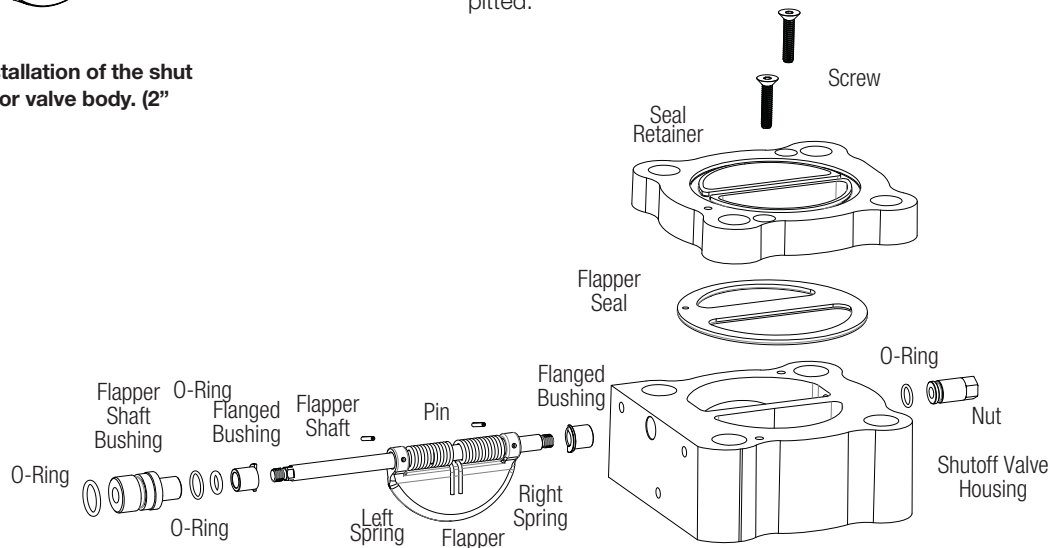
Shut Off Valve Assembly and Disassembly (2\"/>
